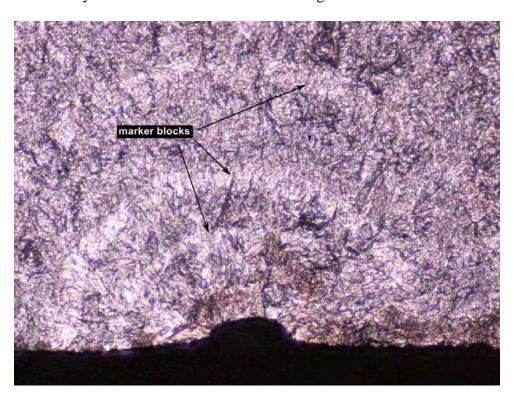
Fracture Surface of Critical Crack on Specimen 614-1
